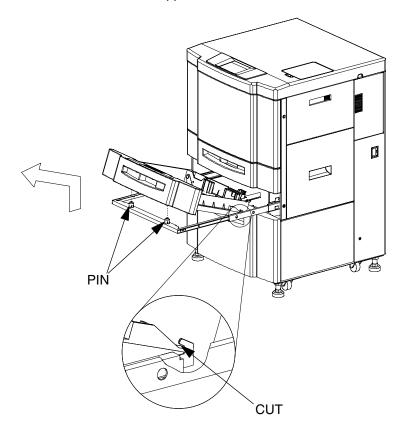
Removal of the 500 Sheet Hopper(Hopper 2 & 3)
